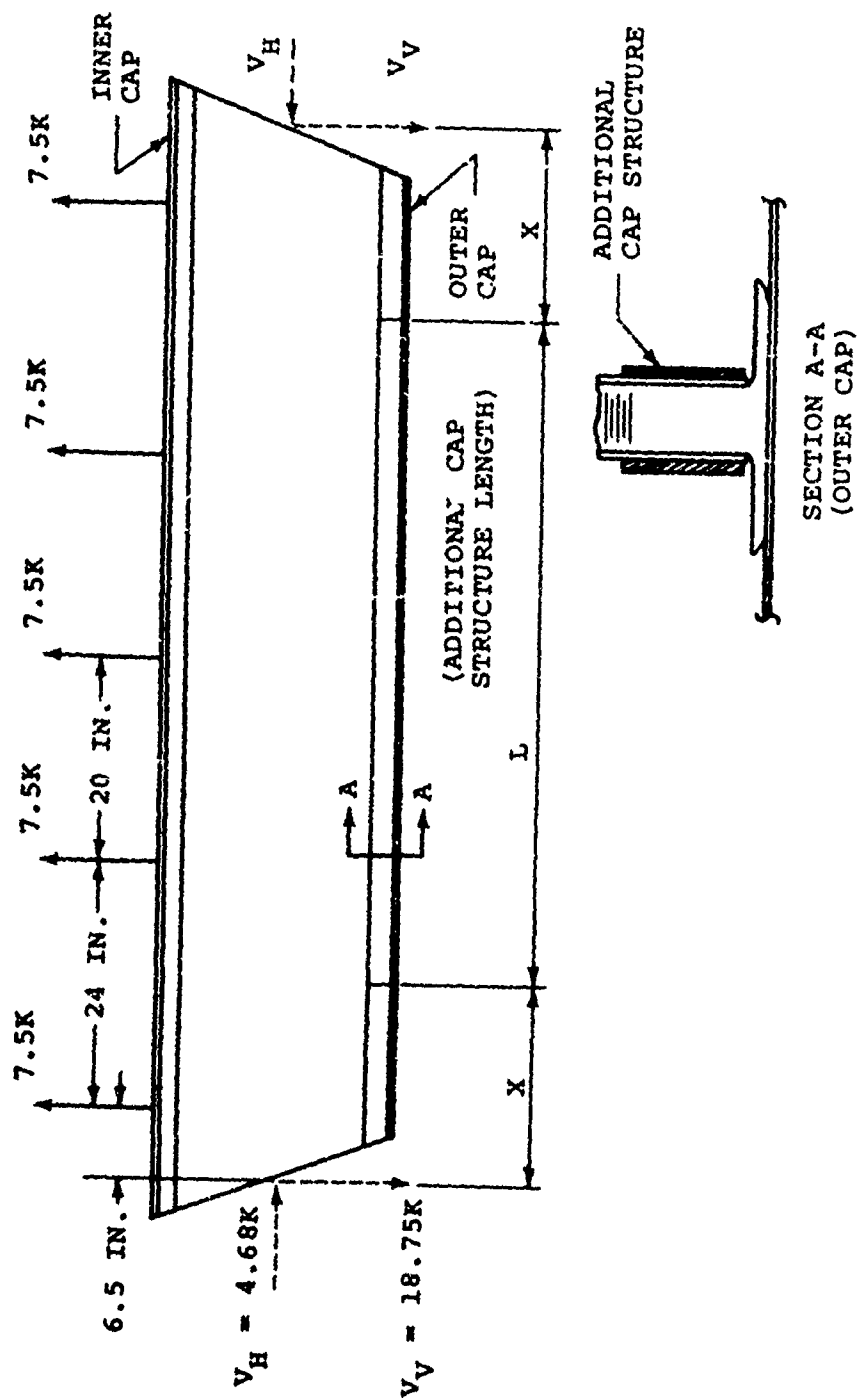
Typical Floor Frame With 7.5K Tiedown Loads.
